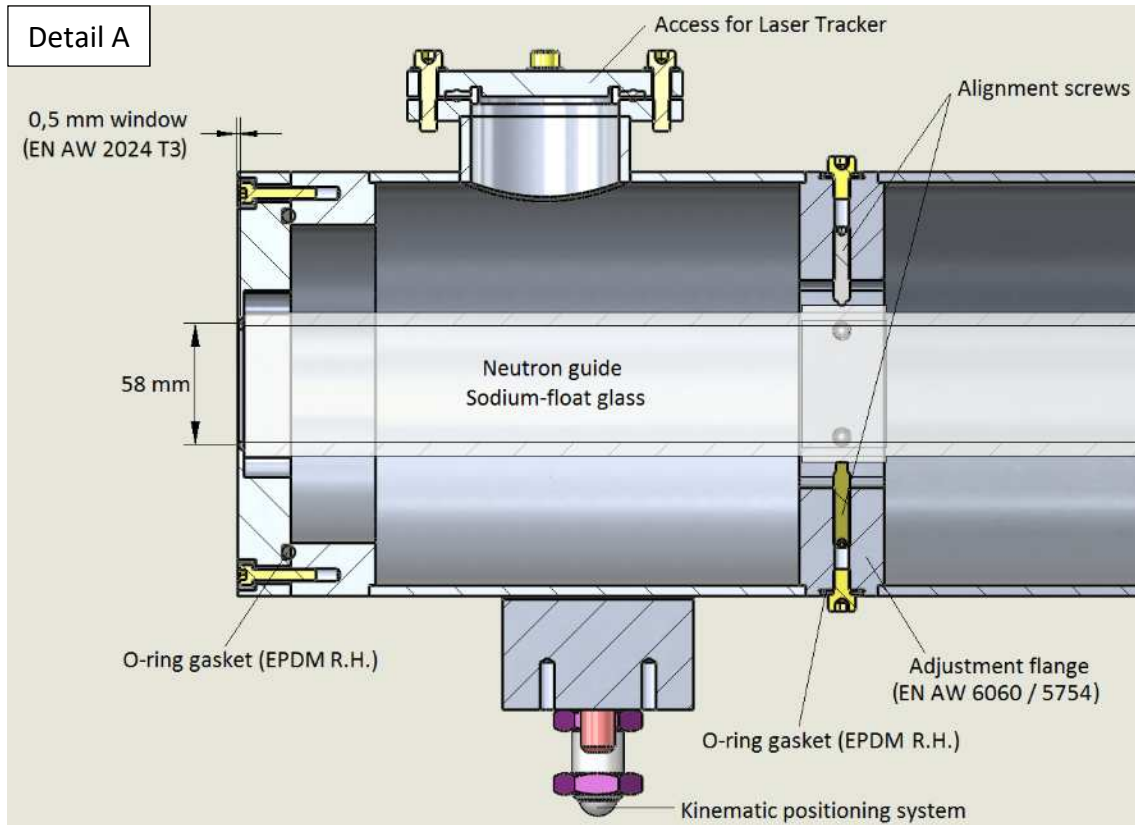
A cut view of vacuum housing 1 showing the neutron guide, adjustment flanges, kinematic positioning system and access for laser tracking.
